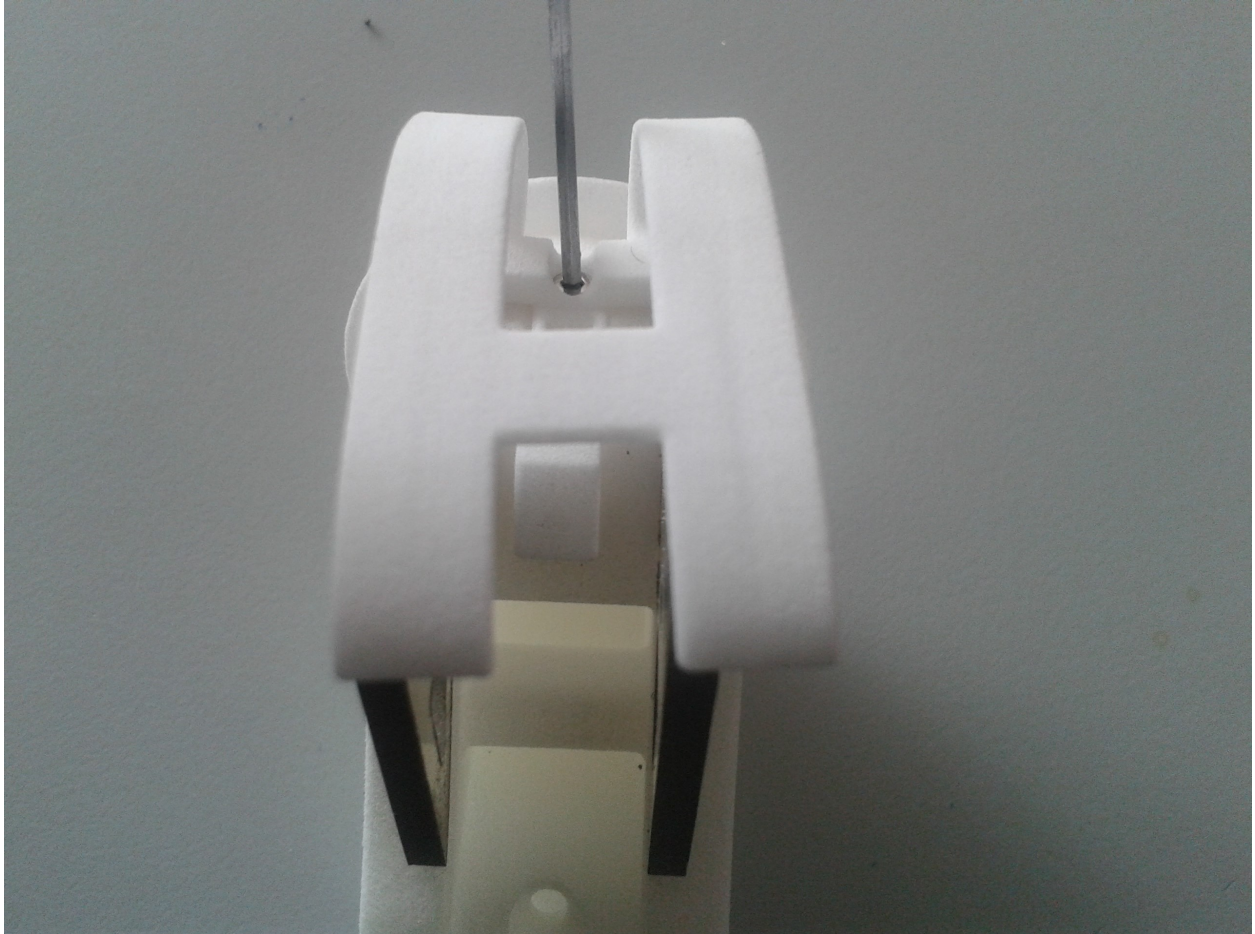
Fix the cable catching mechanism with M2 screws.
